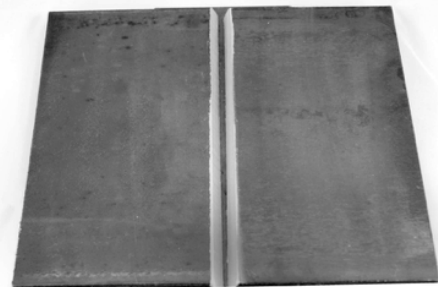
V- groove joint (root gap - 2 mm, angle - 45)
